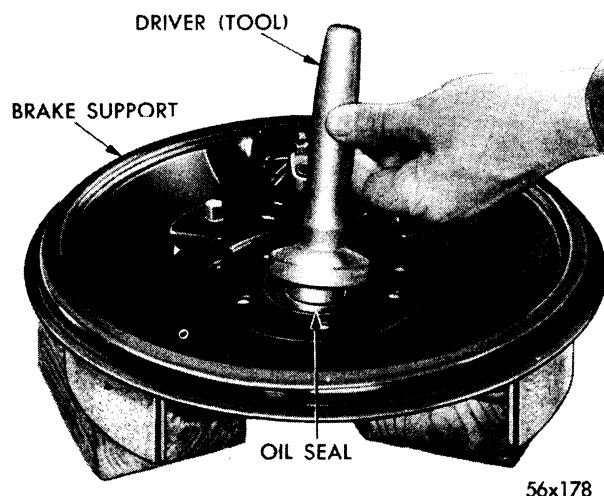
Removing Outer Axle Shaft Oil Seal with Tool C-839
